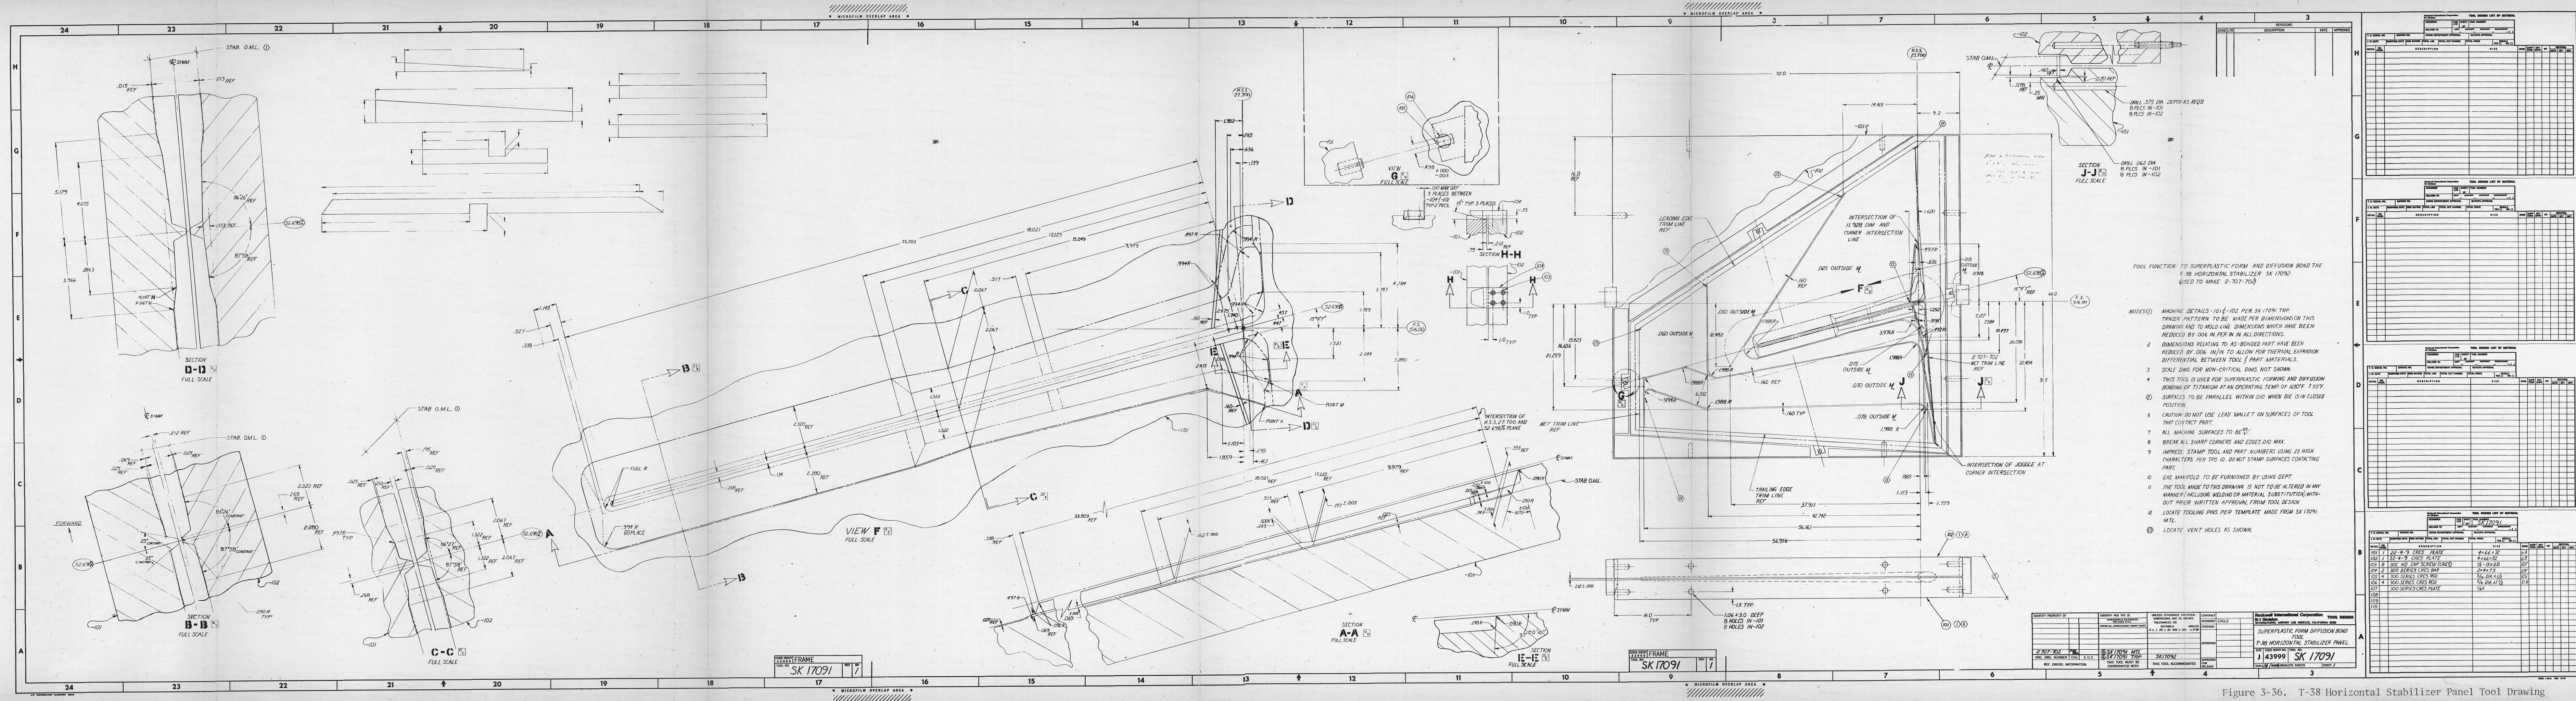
T-38 Horizontal Stabilizer Panel Tool Drawing
